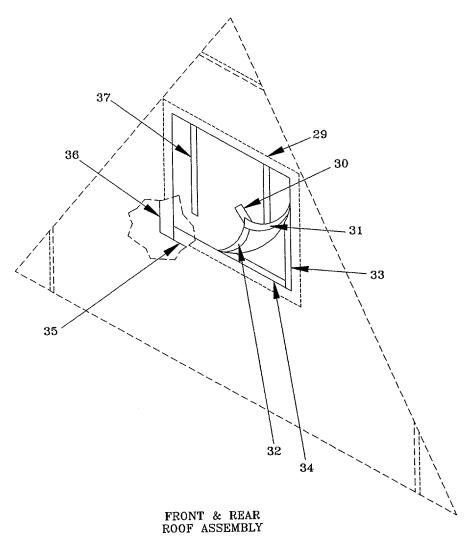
TENT BODY ASSEMBLY (Sheet 3 of 10)
